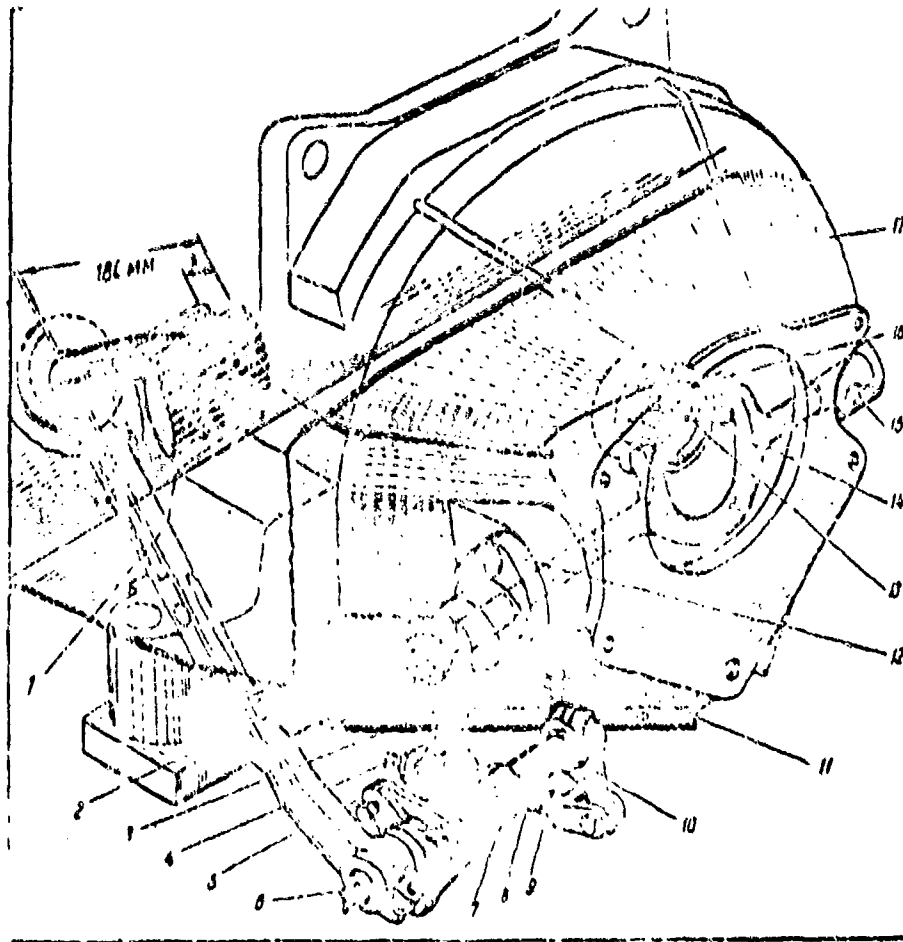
Clutch disengaging linkage of the ZIL-130 motor vehicle:
